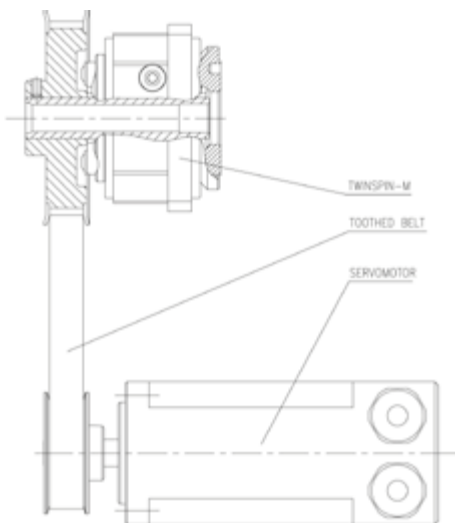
Example of the use of the hollow-shaft version of the reduction gear, driven through a toothed belt
